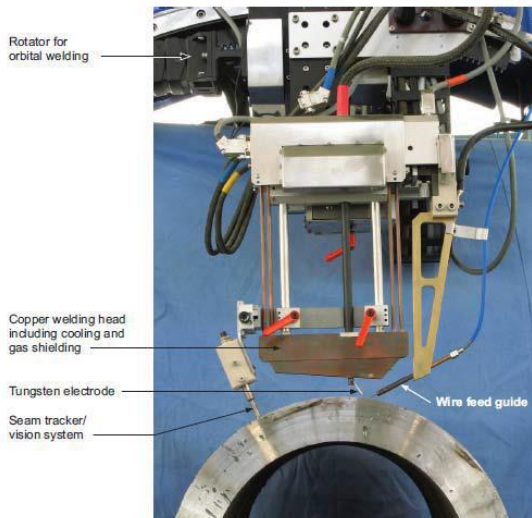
Typical Narrow-gap GTAW welding with an orbital torch. [Image courtesy of Polysoude]
